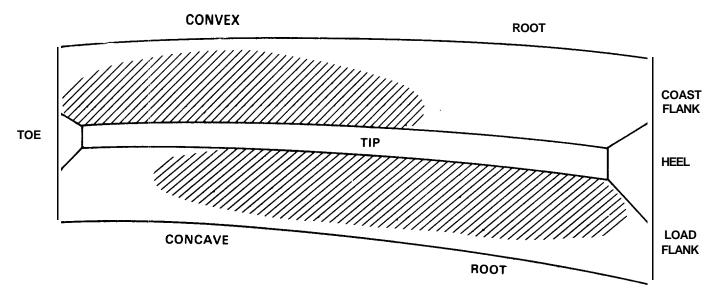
Tooth Contact Pattern: Starboard Upper Gear After Increasing Bearing Clearance, at 192 Hours of Operation
